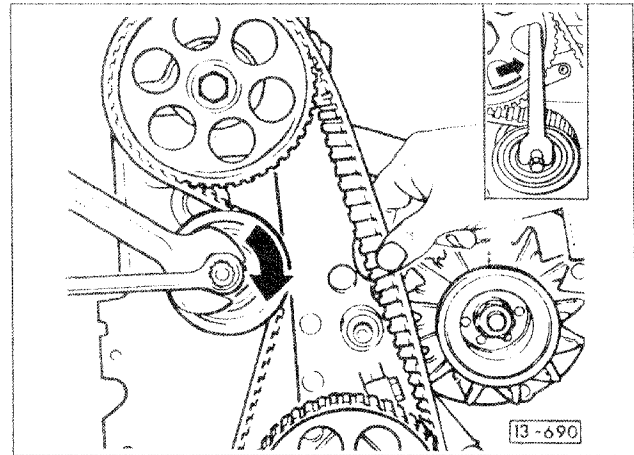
Camshaft drive belt tension being adjusted. Check tension halfway between the camshaft and the intermediate shaft sprockets. For later style tensioner use spanner (inset) to engage holes in tensioner.
